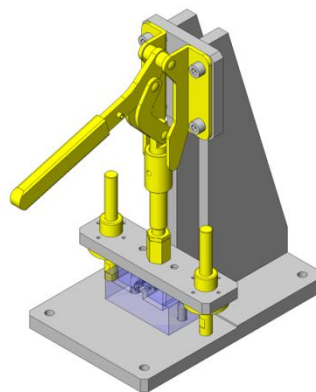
The example of CAD drawing which implement the concept of hand press mechanism
